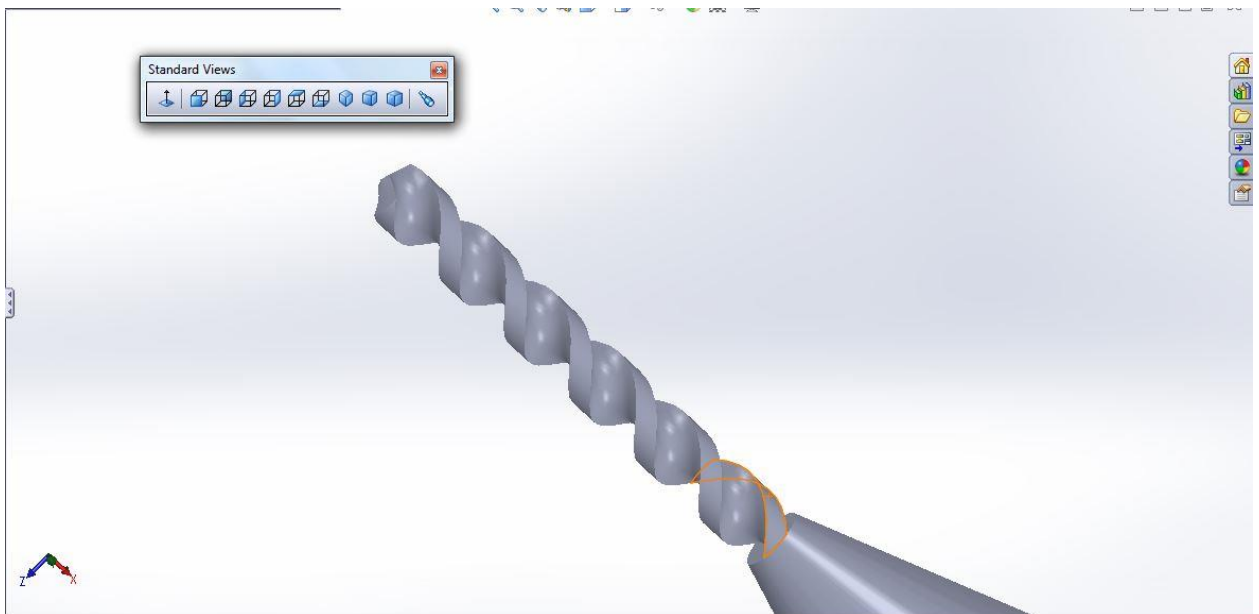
Enlarged view of the flute of the micro-drill in SOLIDWORKS.
